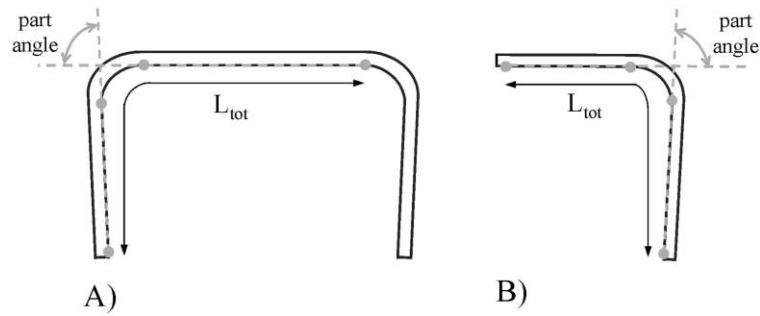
Schematic of how part angle measurements were performed on (a) C-shaped parts, and on (b) L-shaped parts. Straight lines were fitted to two points on each flange or web segment.
